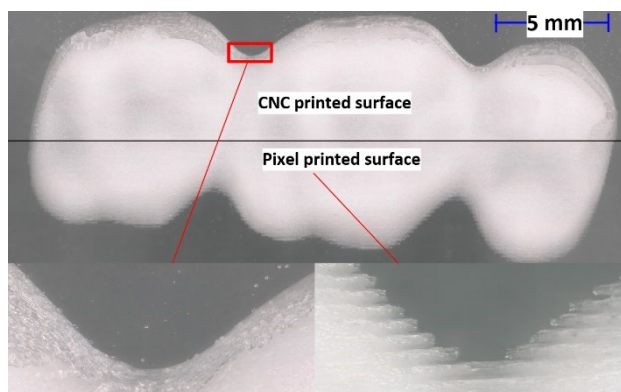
3D printed dental bridge with and without CNC printed surface - MH2910F
